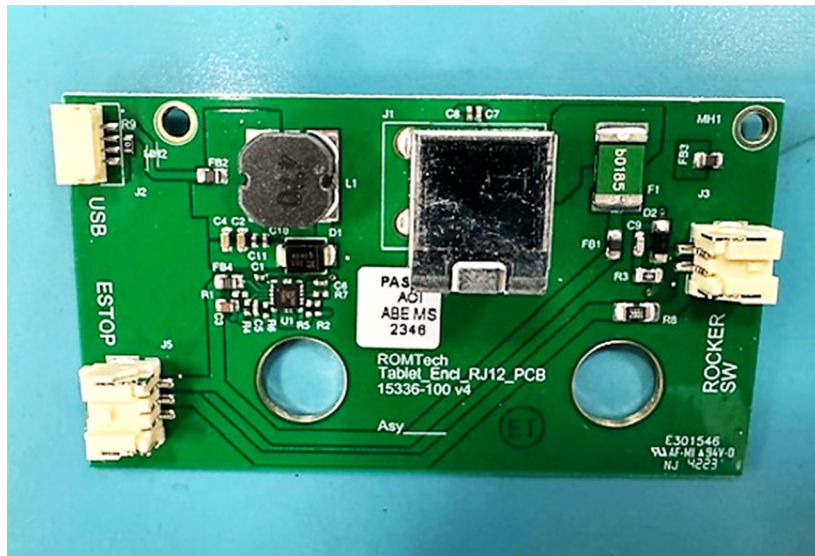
; Top side Tablet Enclosure RJ12 PCA, 15336-200 Rev 4
